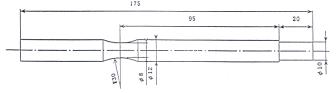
Shape and dimension of the specimen diameter of 8 mm
